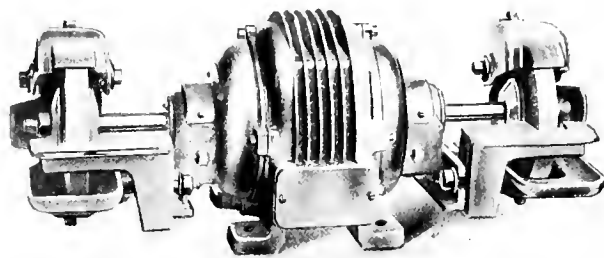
Motor-driven Grinding Equipment built by the General Electric Co., Schenectady, N. Y.
